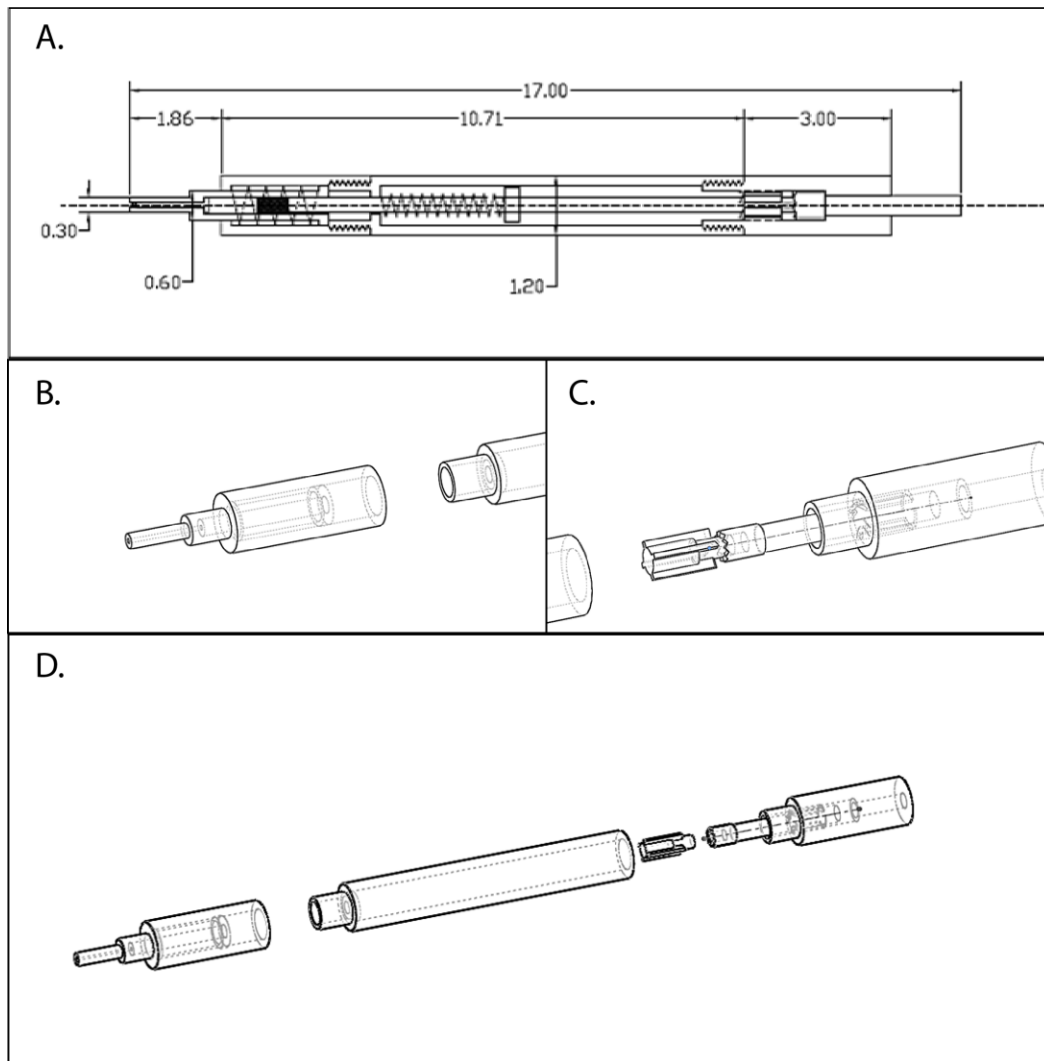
Magnetic wand detailed drawings and 3D assembly. (A) Detailed cross-sectional profile (B) Probe and magnetic shield assembly. (C) Rear mechanical assembly for magnet engagement and disengagement. (D) Full 3D part assembly. Units are in centimeters.
